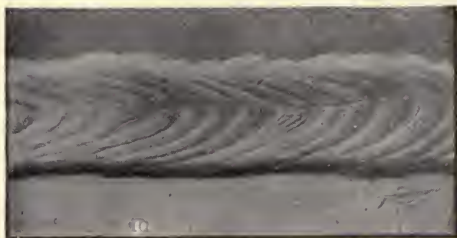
Oxy-acetylene weld on lead.
